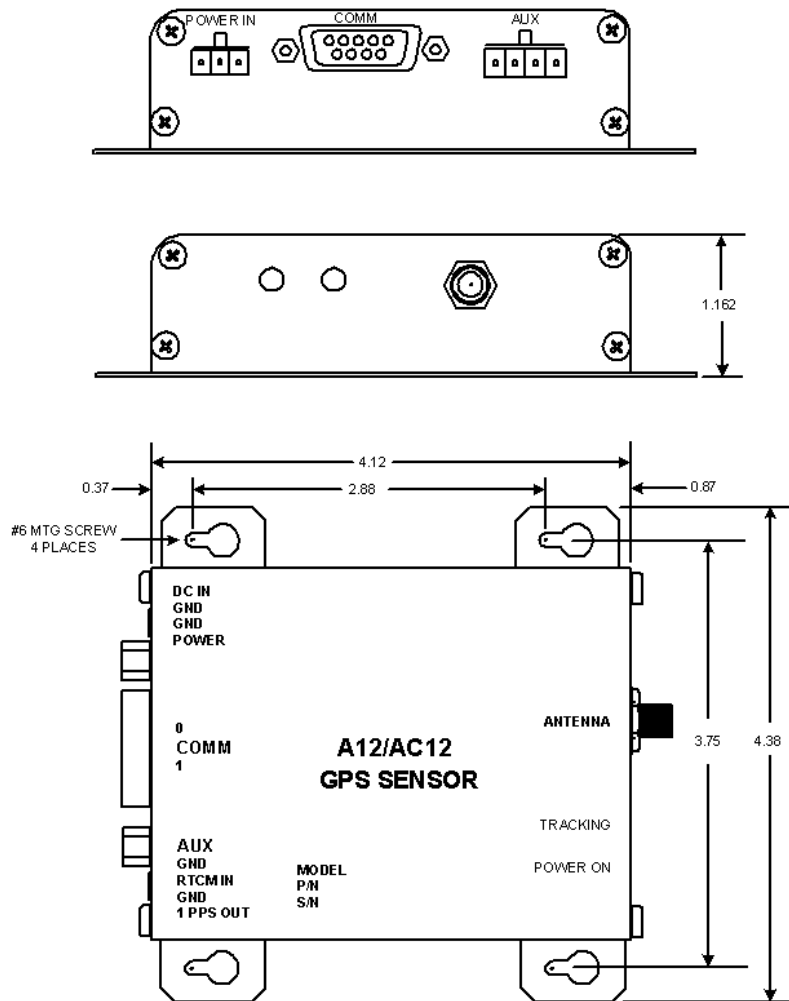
A12/AC12 Sensor Dimensions (Inches)
